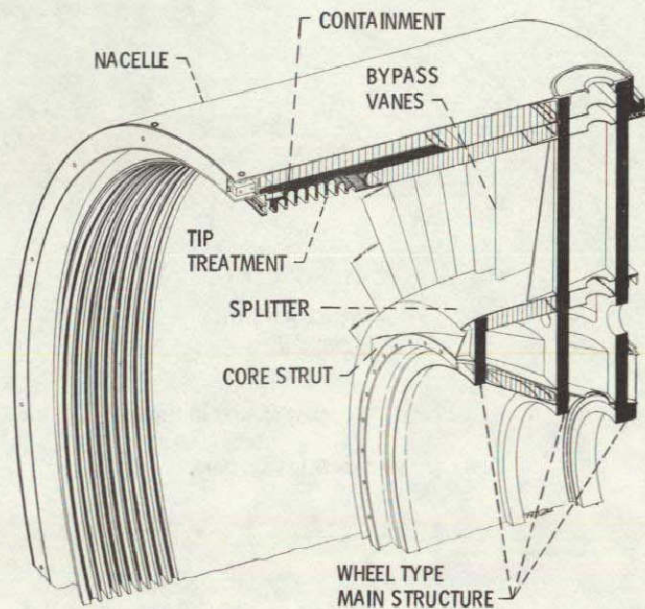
Cutaway view of composite fan frame for quiet, clean, short-haul experimental engine.
